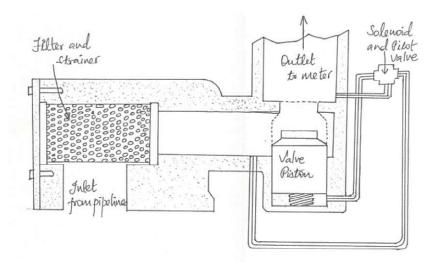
Schematic diagram showing Remote Dispenser Control Valve (Source: team-bhp.com)
